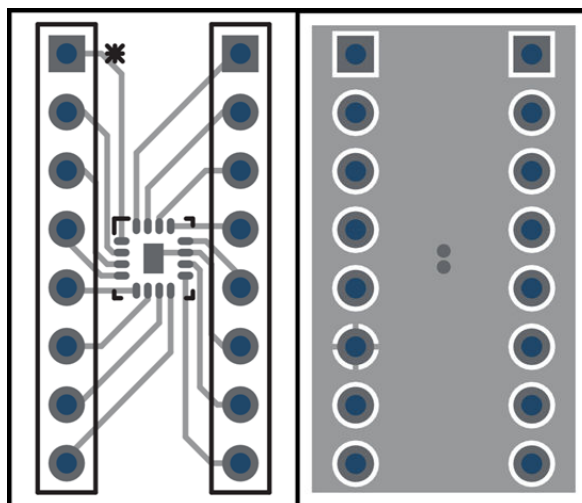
RGY package top layer (left) and bottom layer (right) PCB layout
